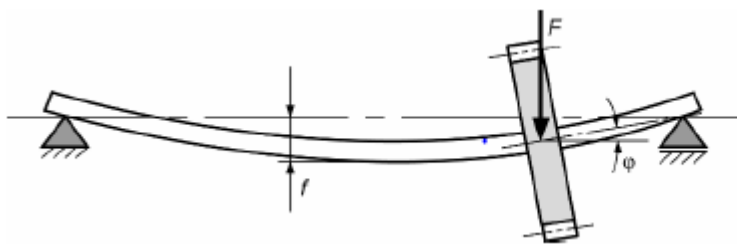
Deflection f and bending angle ϕ in shafts with large distances between bearings and asymmetrical loading.
